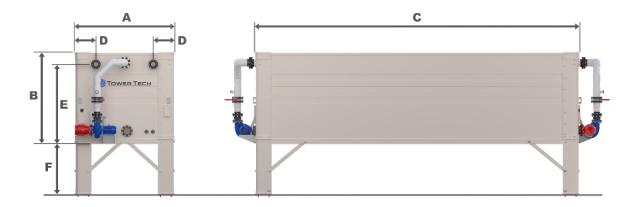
Dimensions - i1xxxx-FC & i2xxxx-FC
